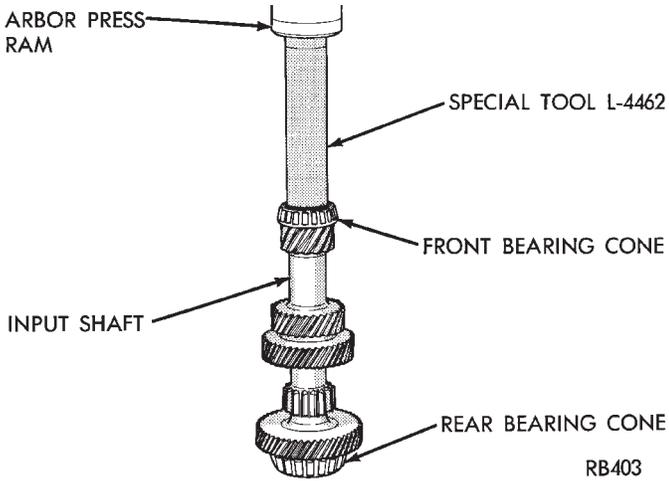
Remove Input Shaft Rear Bearing Cone
